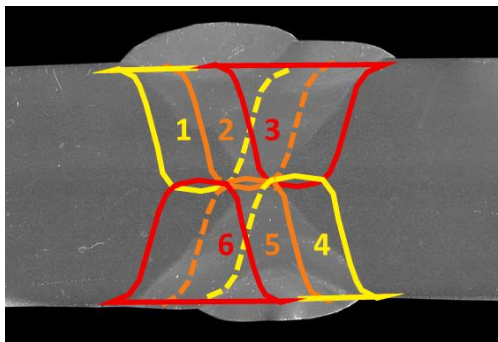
Configuration for the friction stir processing of the as-welded plate.
